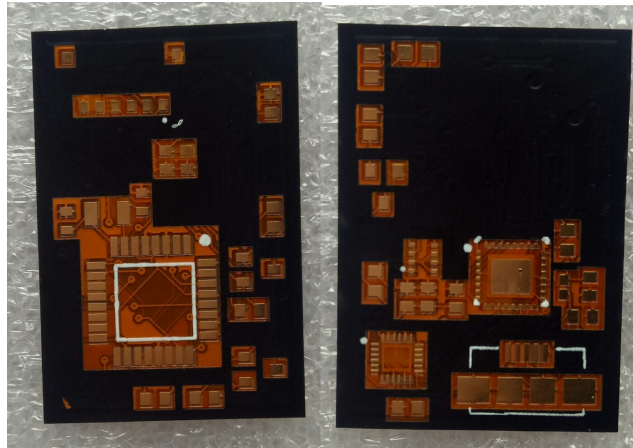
Image of the printed PCB design version one, the top of the board is on the left and bottom on the right.
